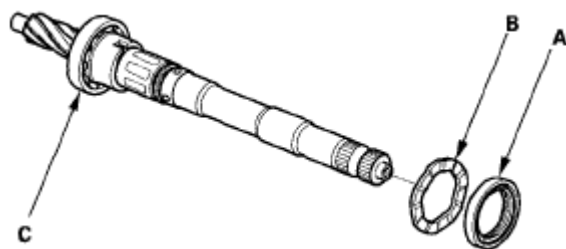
Identifying Valve Oil Seal And Wave Washer
